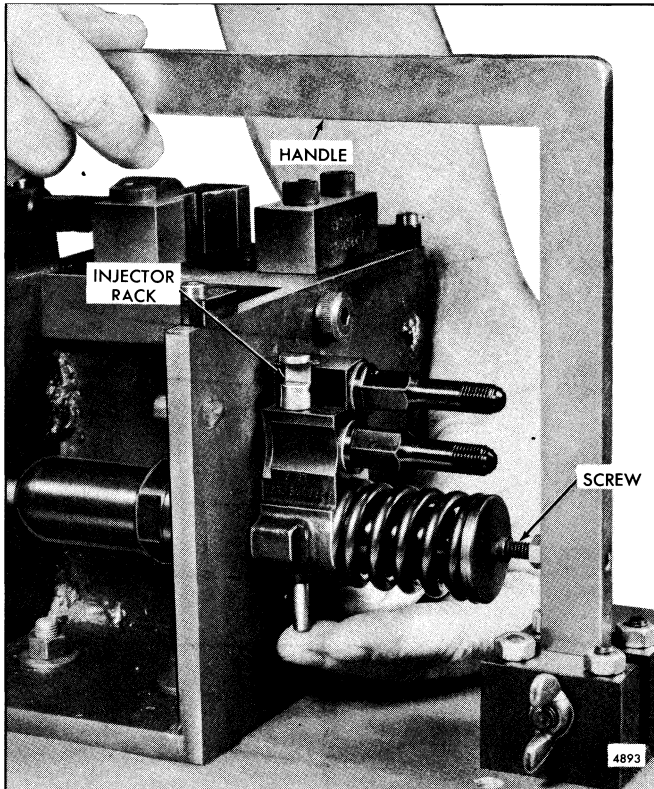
Checking Rack for Freeness in Tester J 22396
